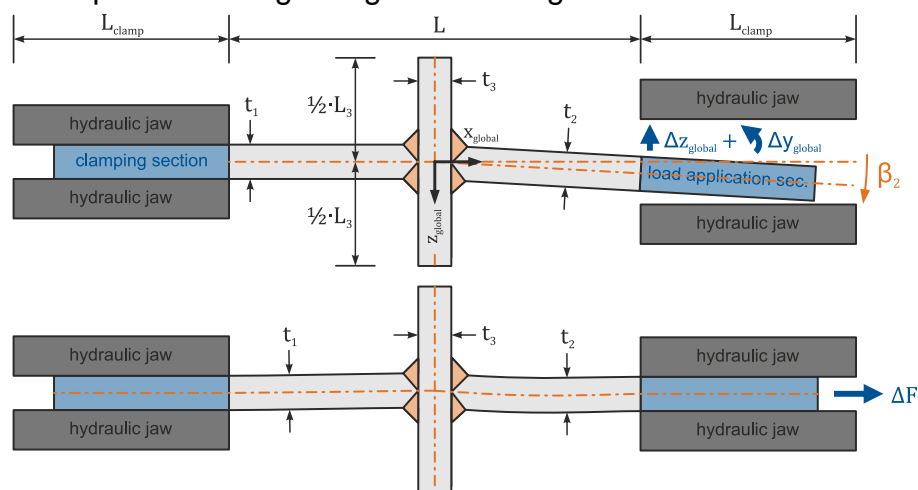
Cruciform joint geometry with angular misalignment before clamping process (top) and deformed shape after clamping process (bottom)
